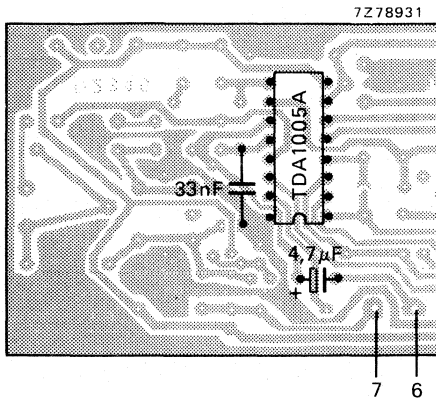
Printed-circuit board component side, showing component layout of Fig. 13.
